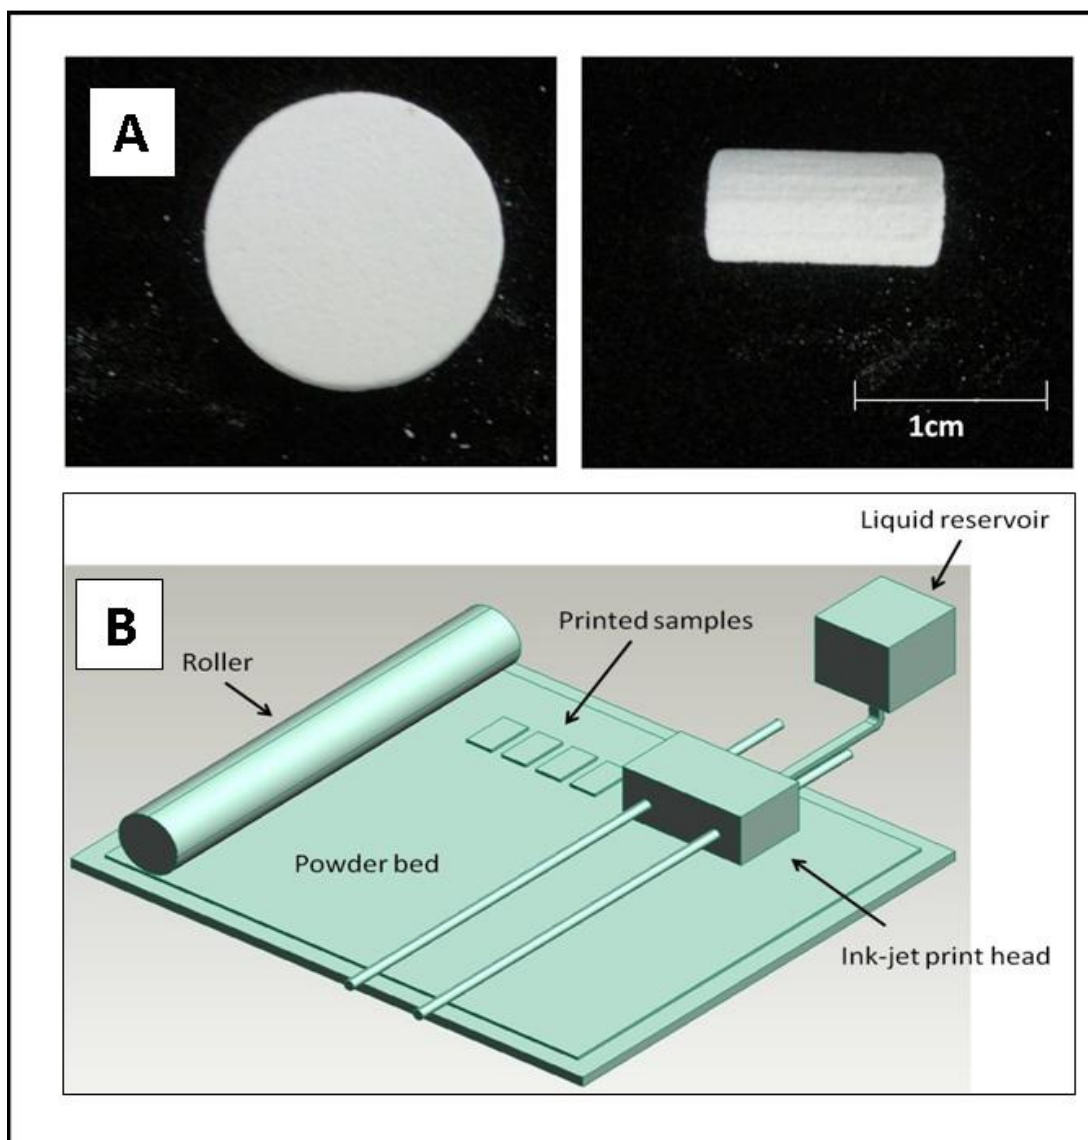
3D printed CaP disc and cylinder (A) and schematic of the printing process (B).
